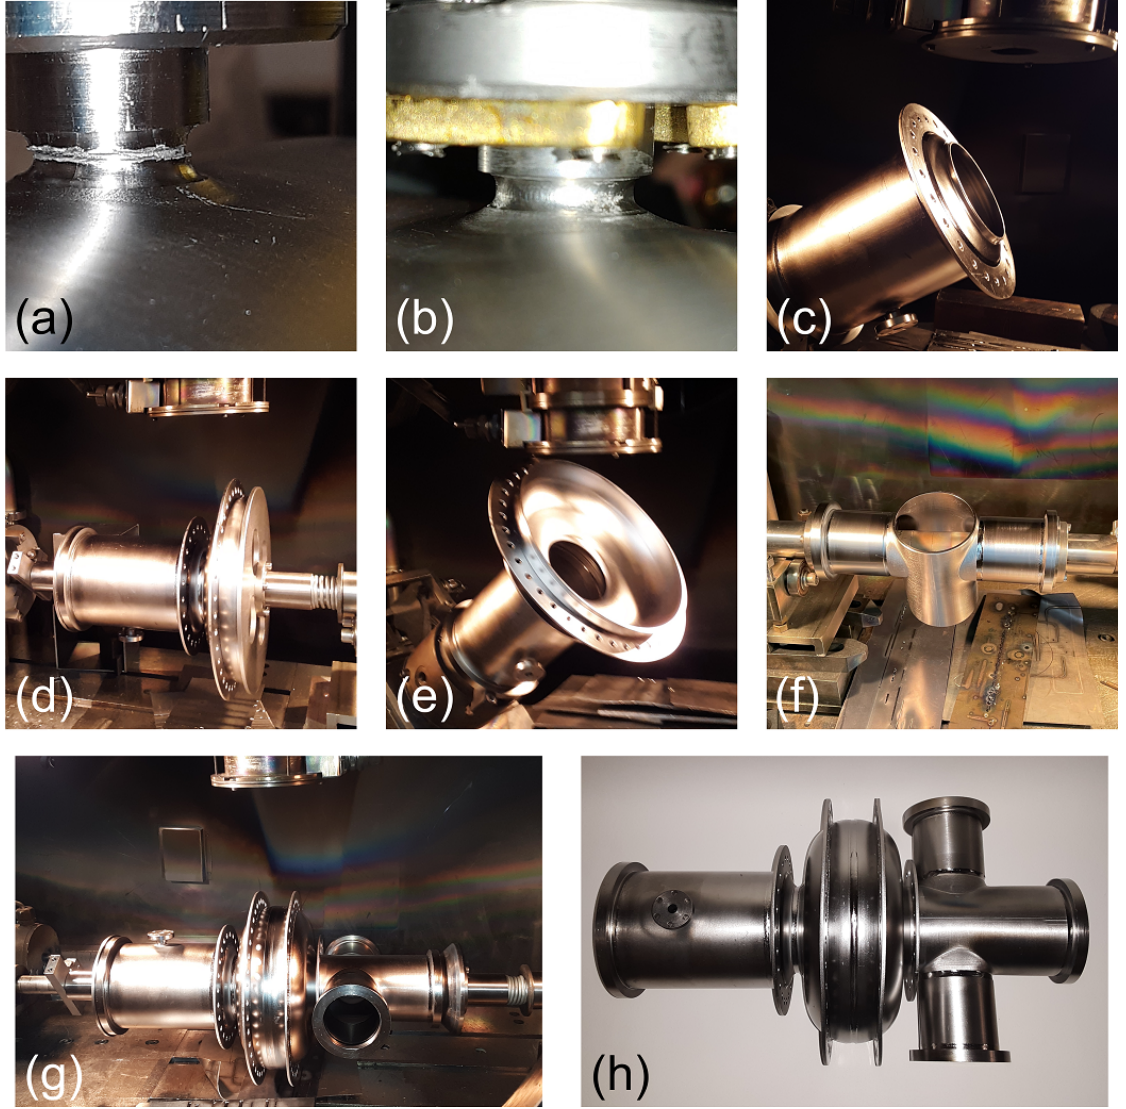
Various stages of the e-beam welding process of LCC1-1: (a) failed weld of the RF probe port (step 1) due to incorrect beam parameters, (b) successful weld of the probe port (image taken during later assembly), (c) weld step 4, (d) weld step 6 (outside), (e) weld step 6 (inside), (f) weld step 8, (g) weld step 12, (h) e-beam welding completed.
